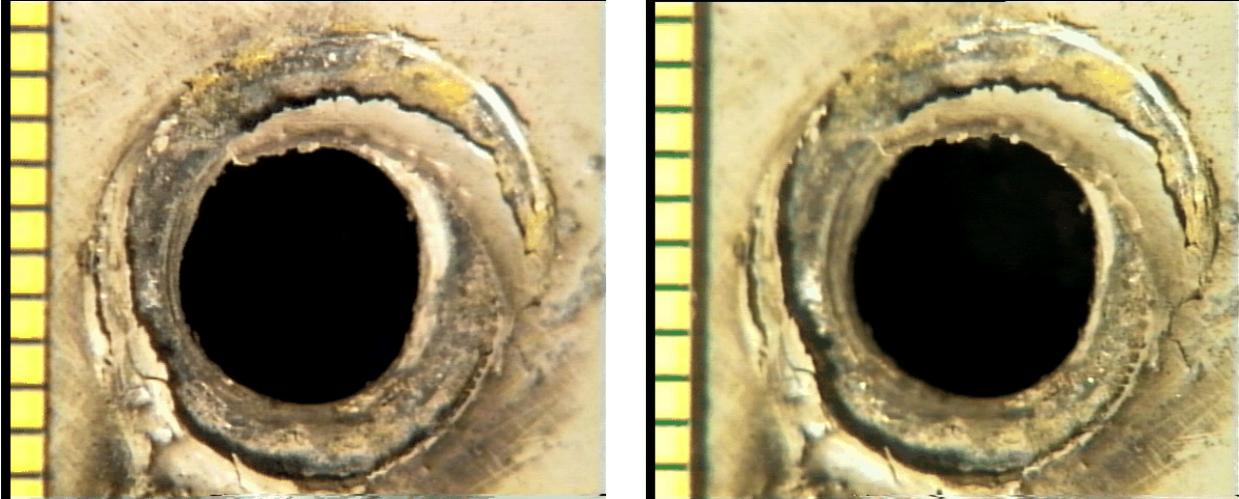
Left and right eye views of a rivet hole encrusted with corrosion. Scales at left in millimeters.
